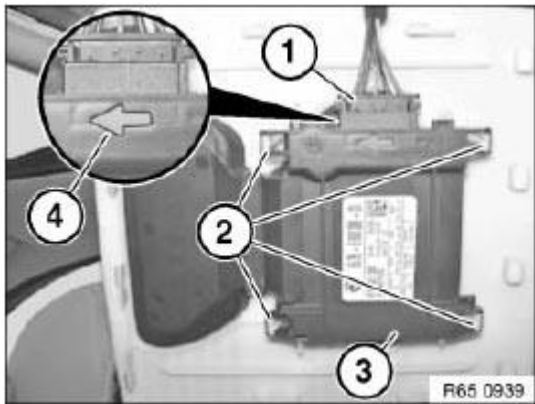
Identifying Plug Connection, Retaining Lugs And Module
